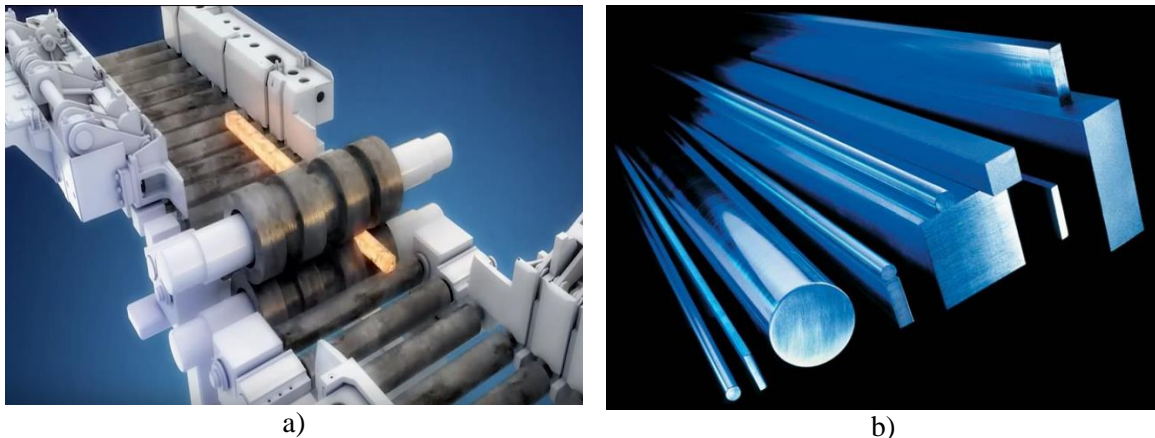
Hot rolling of a bar from tool steel a) and principal shapes of I/M tool steel semiproducts b)
